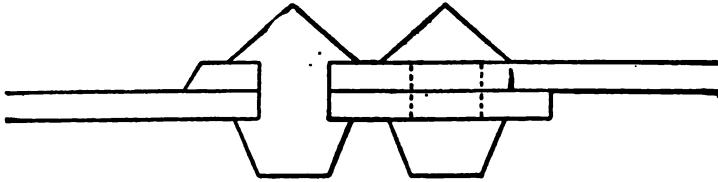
A LAP-JOINT CRACK UNDER THE OUTER EDGE OF THE RIVET HEADS.
